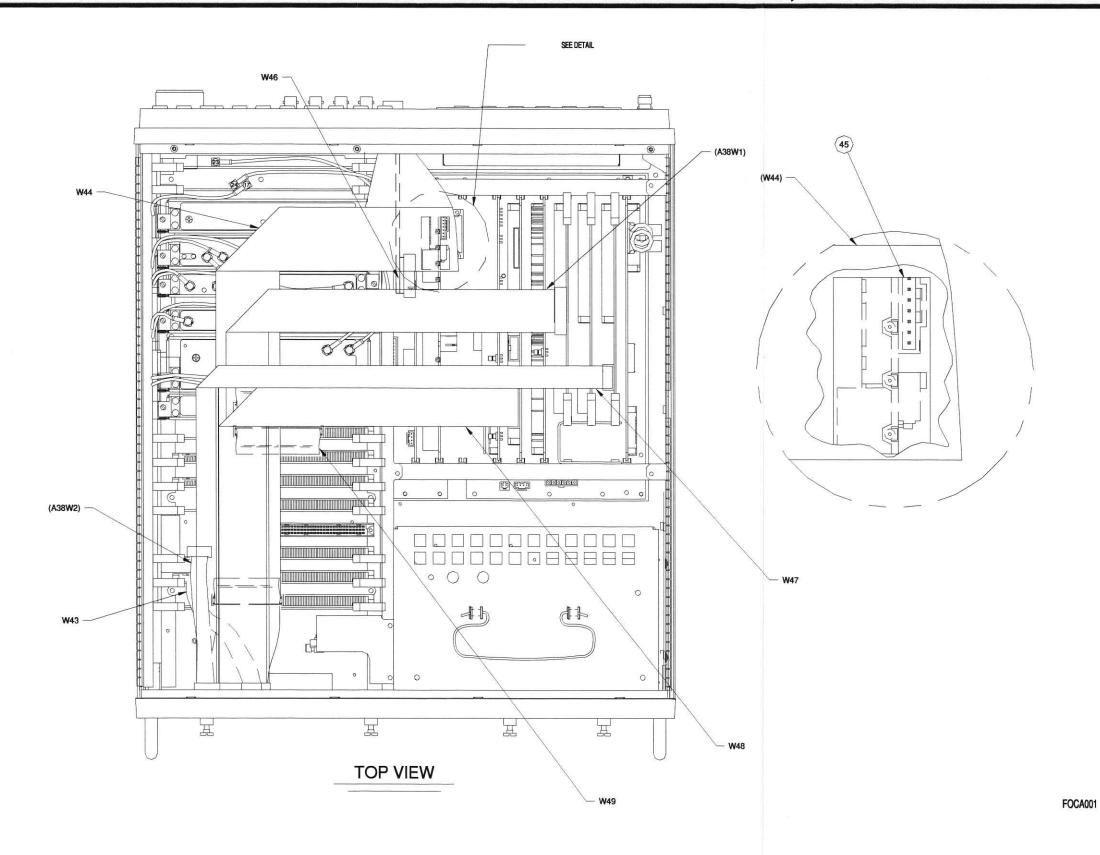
Test Set (34A5) Assembly, Cable Locator and Interconnect Diagram (Sheet 1 of 7)
